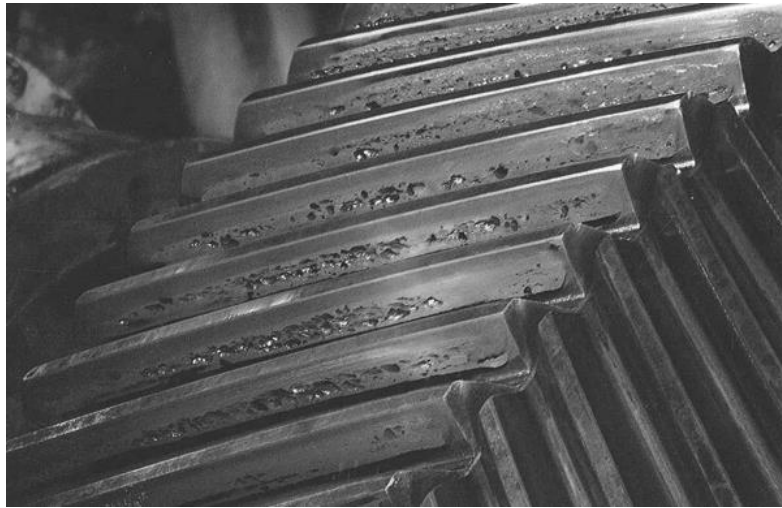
Pitting damage on gear (www.novexa.com).
